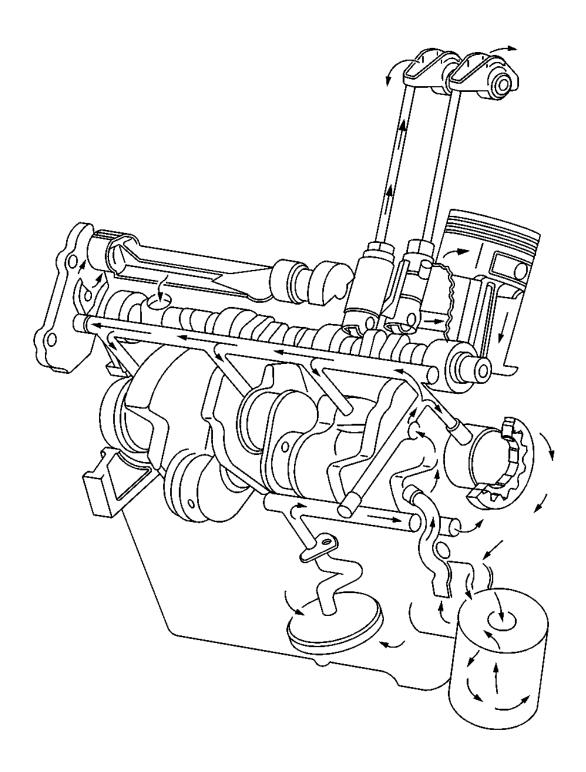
Identifying Engine Lubrication System Courtesy of GENERAL MOTORS CORP.
